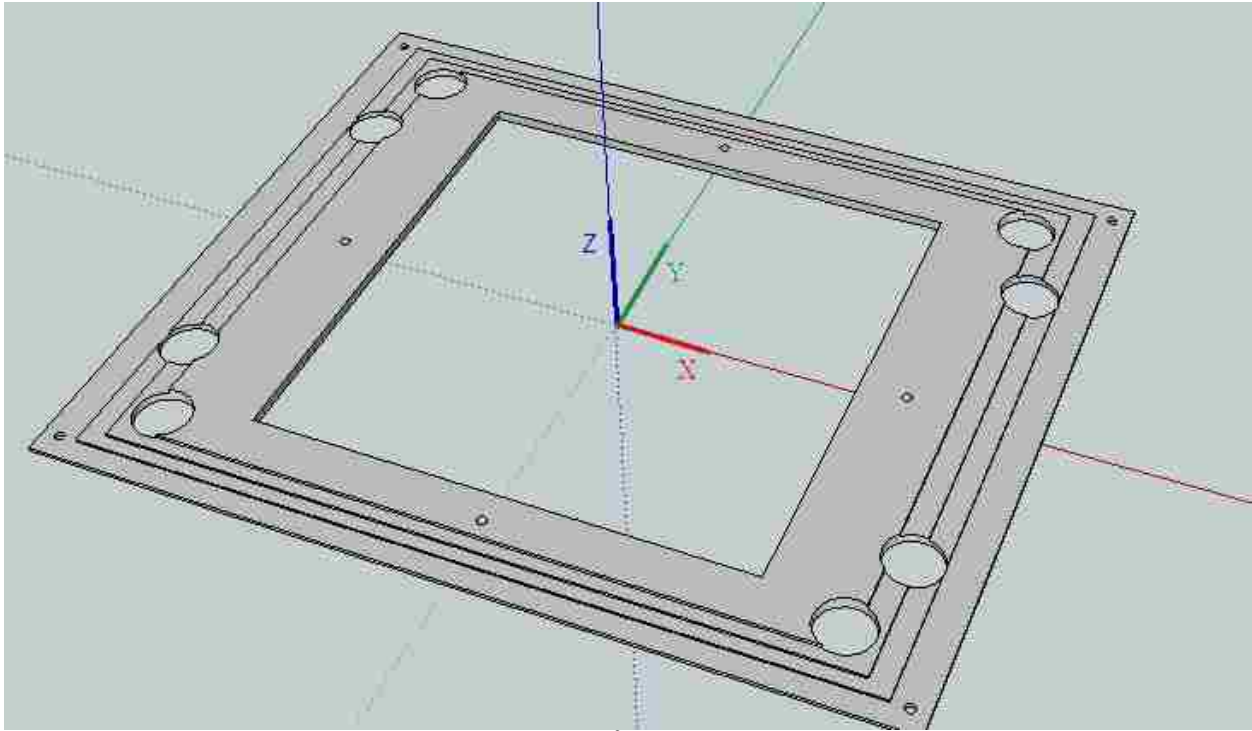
Top orthogonal view of the 20x20 cm² upper trimmer lead plate.
